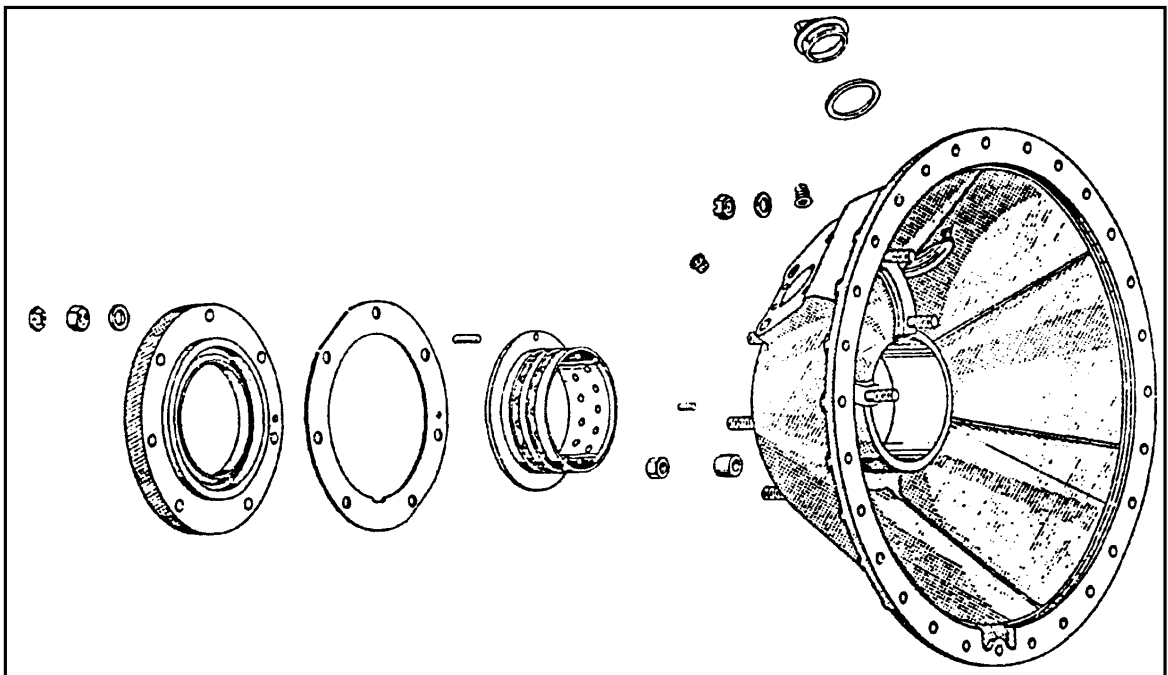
Crankcase Front Section (With provision for mounting propeller governor)
